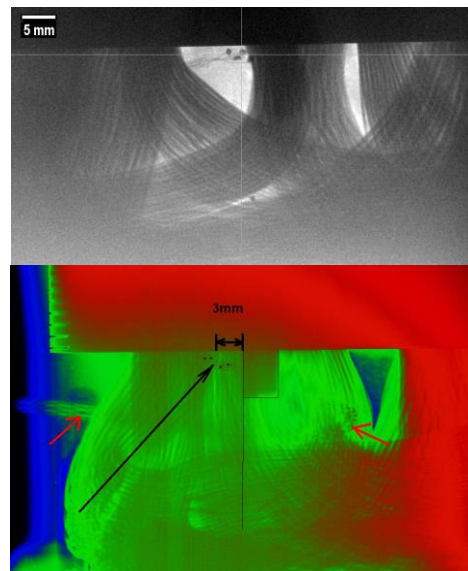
X-ray inspection of the motor stator. The sensor position and orientation is visible thanks to a high-contrast Pb-Sn solder. Stator magnetic material sheets are on top and Cu winding is in the bottom part of the picture. The bottom picture shows the orientation with respect to a small permanent magnet placed to the nearest position in the rotor area.
